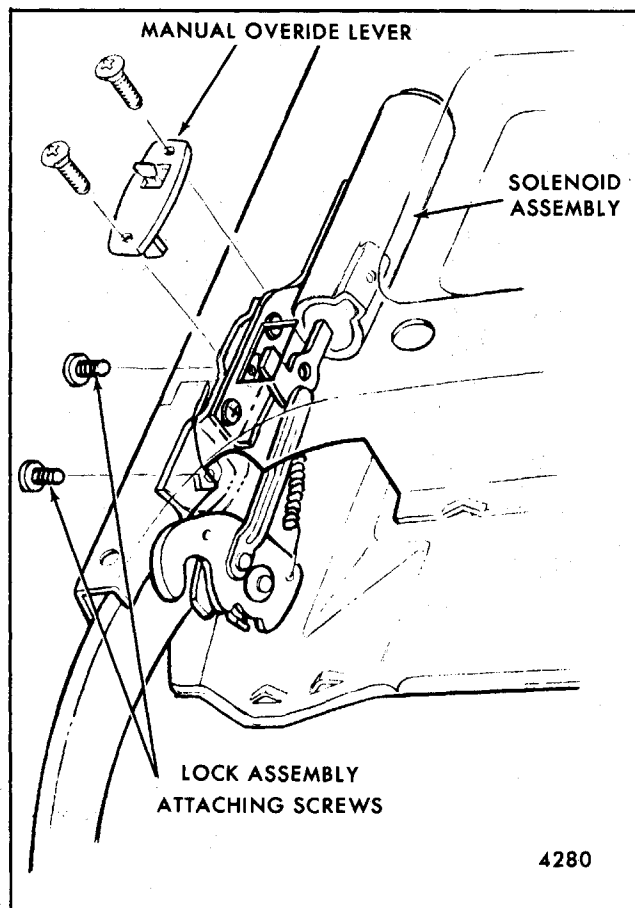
Front Seat Back Electrically Operated Lock - "E"
